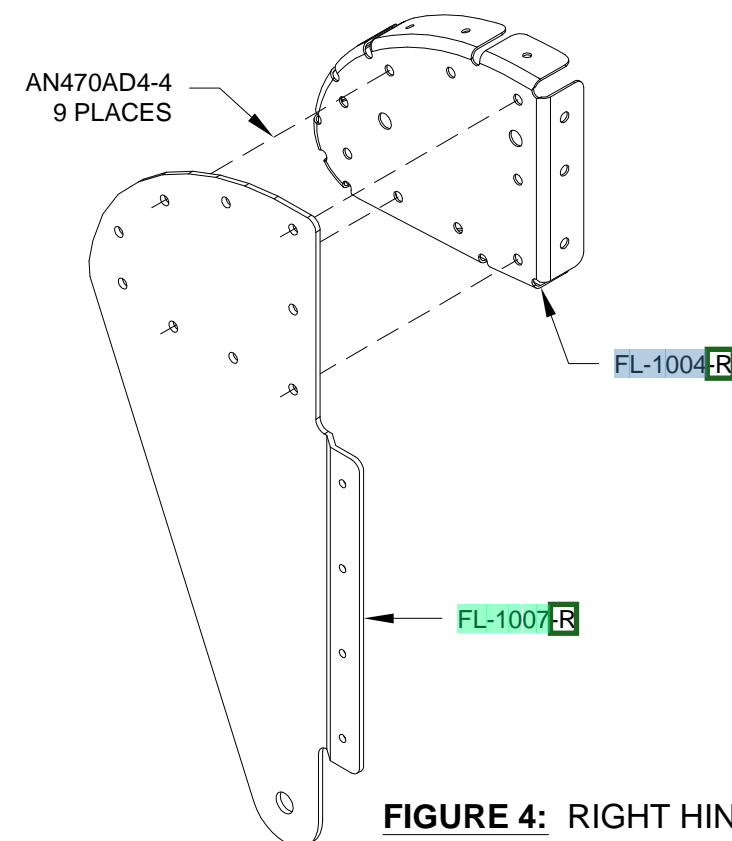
RIGHT HINGE PAIR RIB SUBASSEMBLY
